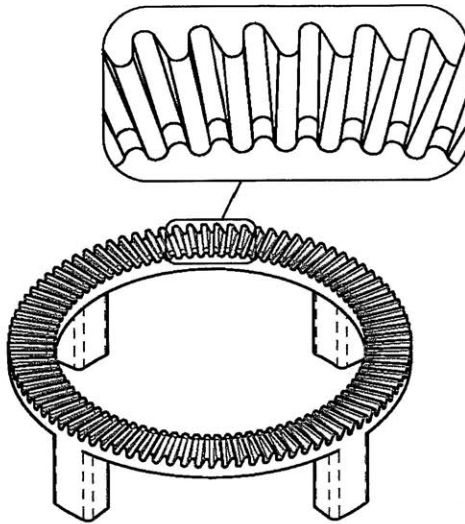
The translating clutch plate shown actual size with a detail 4:1 view of the sawtooth geometry.
